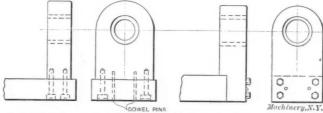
and 112. Different Methods for Securing and Locating the Uprights on Base Plate of Boring Jigs.
